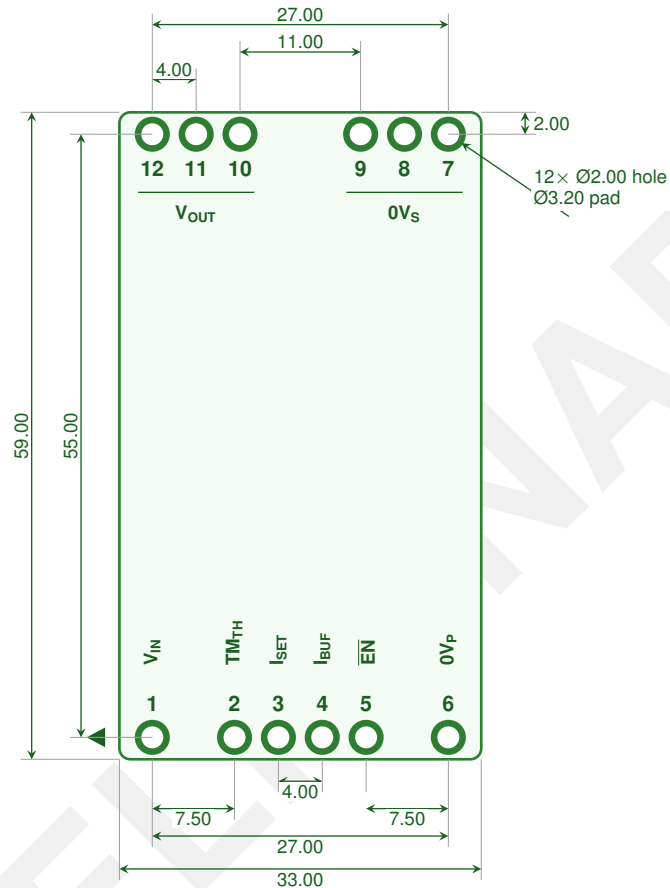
Recommended land pattern (top view, component side). Corner radius 1.0 mm.
